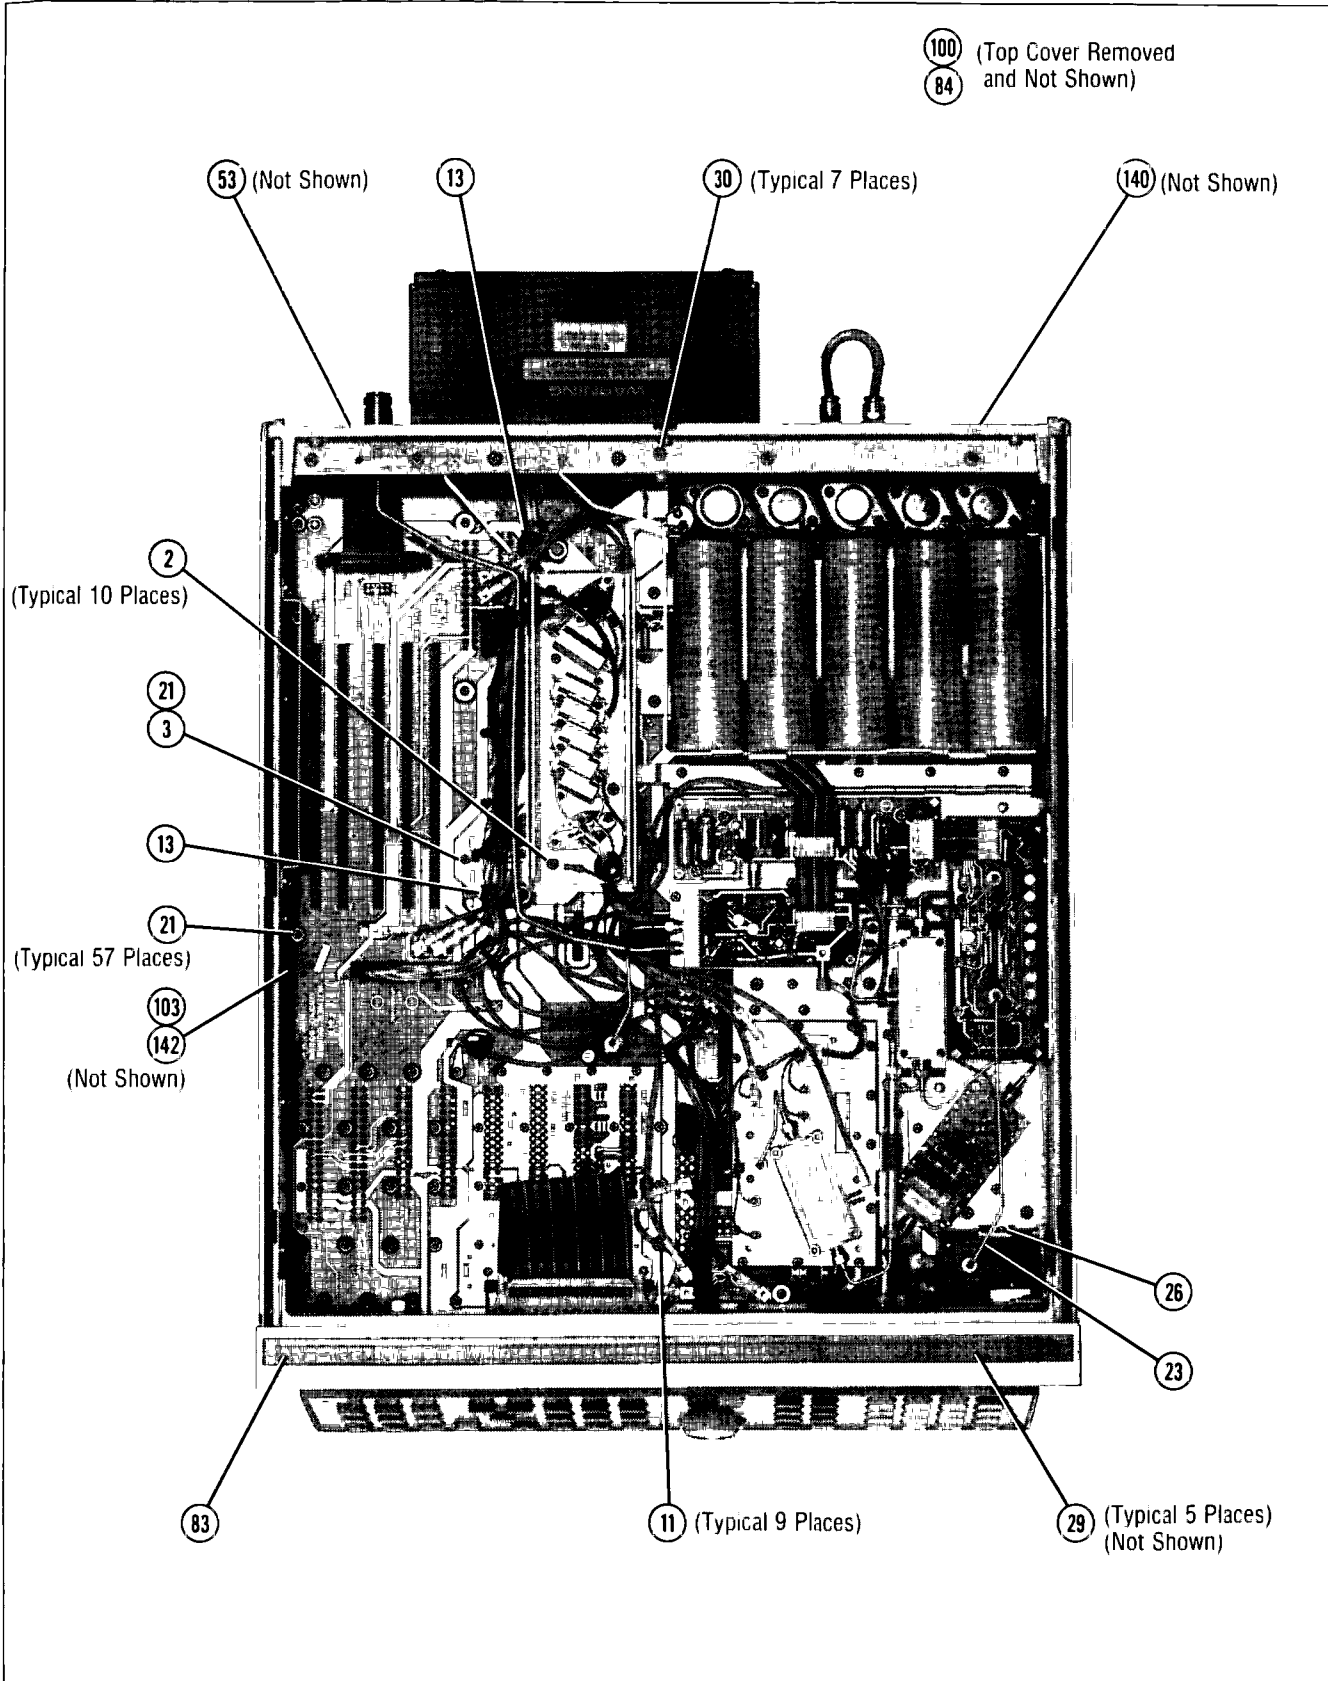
Miscellaneous Mechanical & Chassis Parts (2 of 6)
